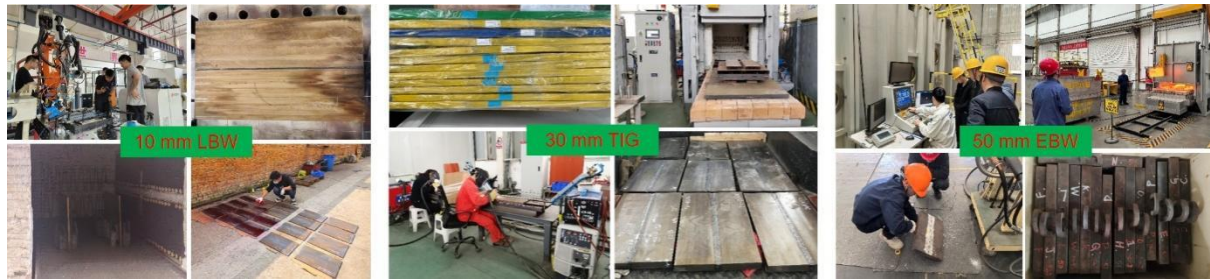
The different welding methods, process, and properties testing plates of CLF-1 steel.
